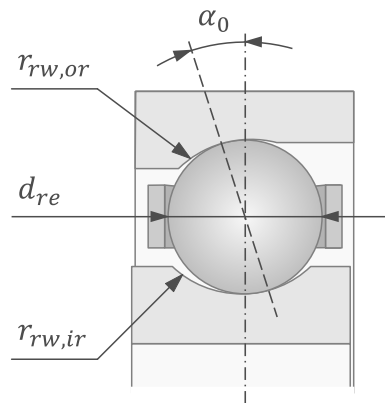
Rolling bearing dimensions related to the rolling element and its direct environment
